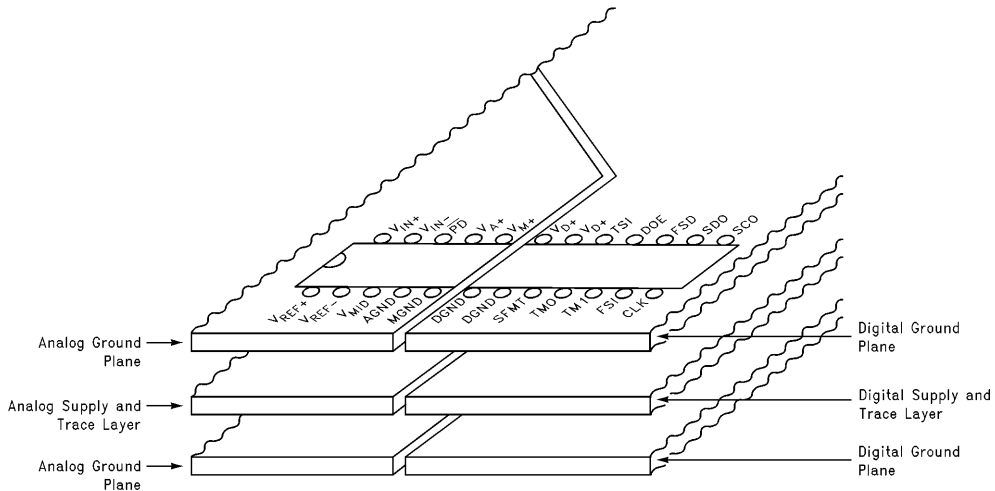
PCB Layout with "Sandwiched" Power Supply and Trace Layers
